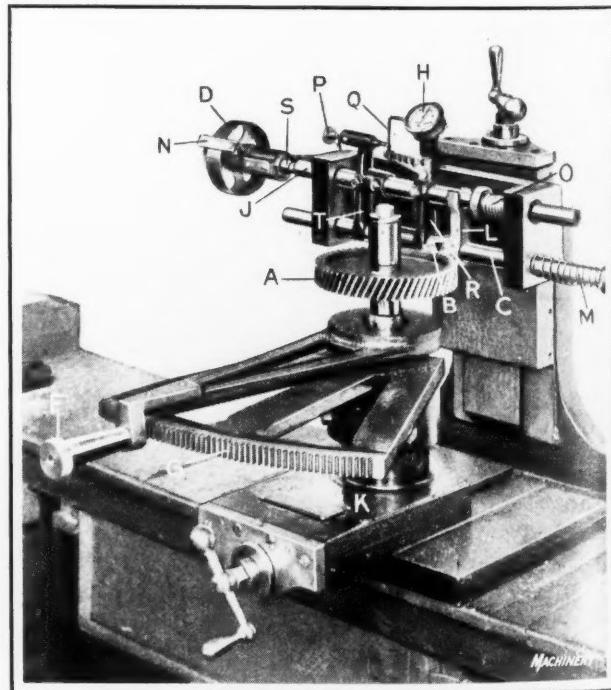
Close-up View of the Involute-testing Machine illustrated in Fig. 1
